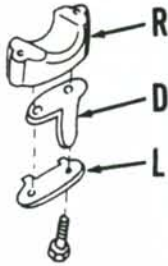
A separate oil dipper (D) is used on MF180 models between rod cap (R) and lock plate (L).
